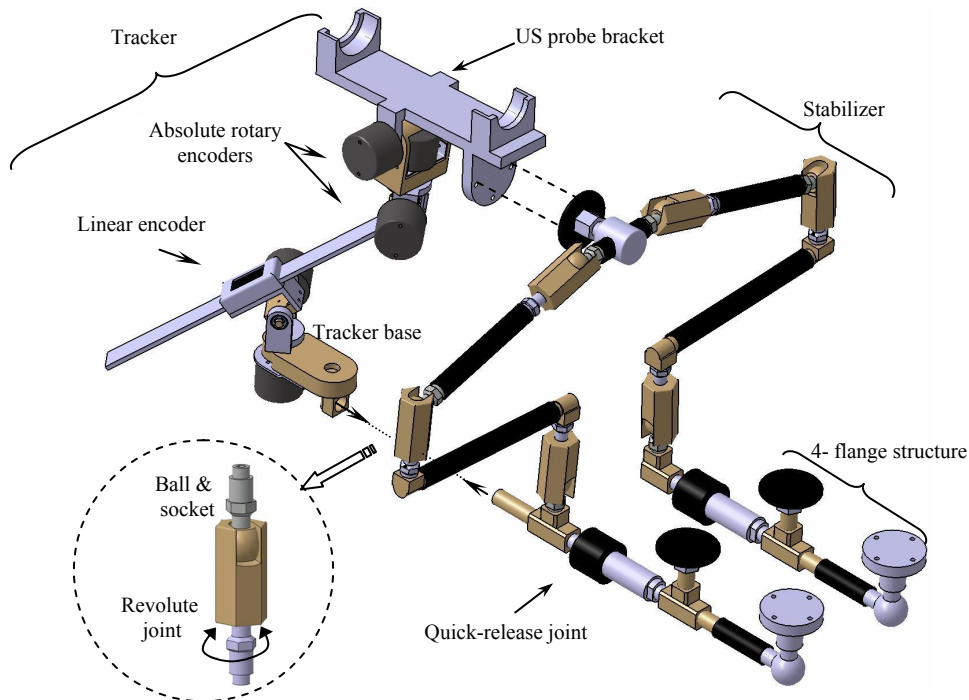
CAD model of the proposed rectal ultrasound probe holder (stabilizer-tracker) mechanism.
